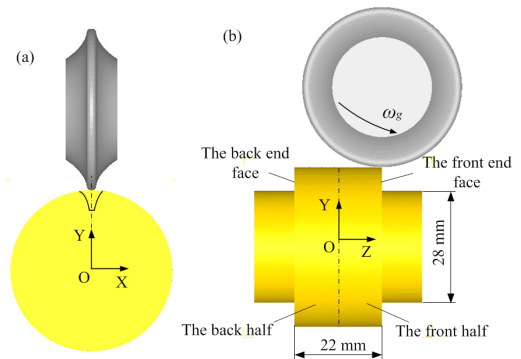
FE models in the DEFORM-3D pre-processor: a) the frontal view, and b) the left side view
